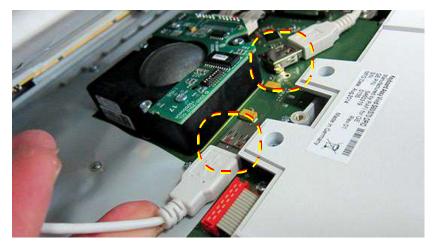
Installing Alphanumeric Keyboard/ Bottom Cover on Operating Panel Keyboard Assembly
